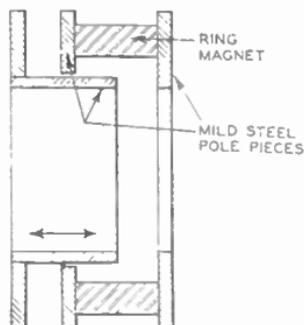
TYPICAL MAGNETIC FOCUSING ASSEMBLY FOR A TELEVISION CATHODE-RAY TUBE.
